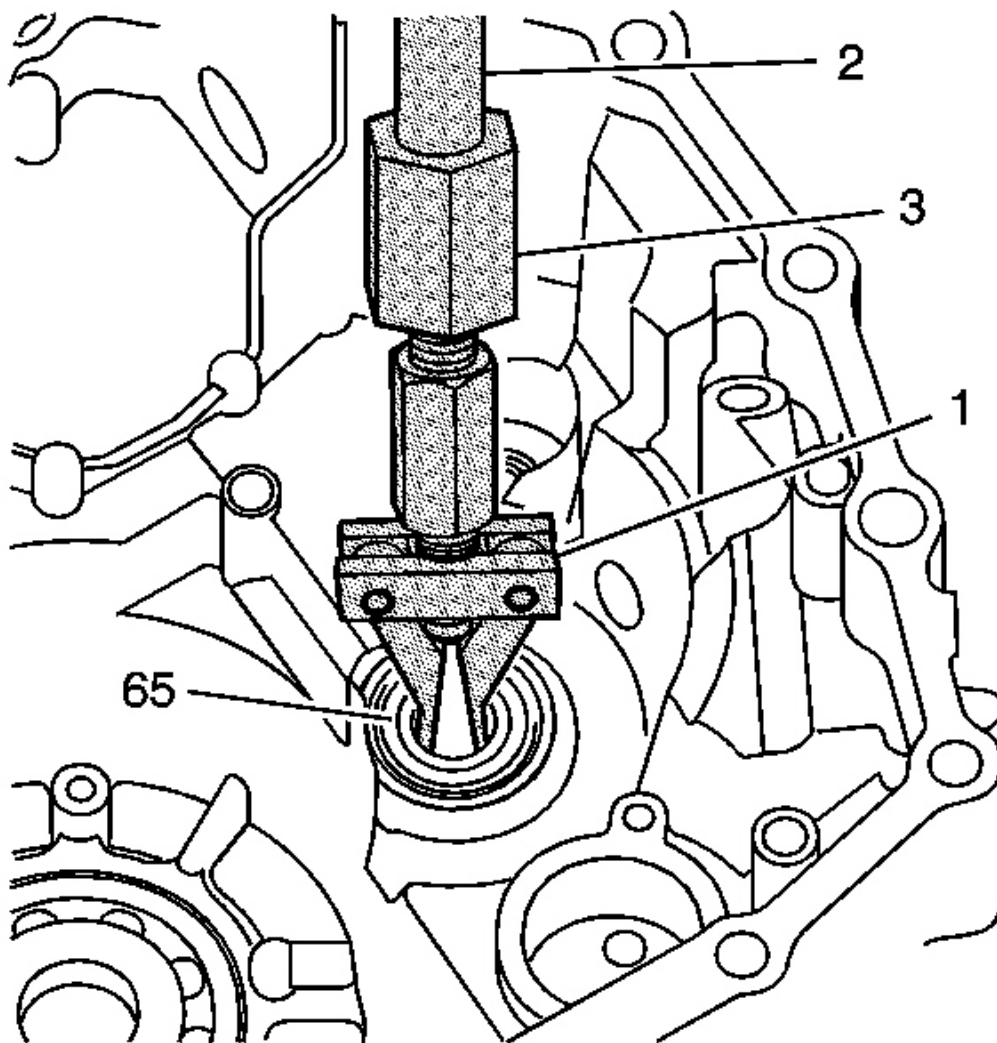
Removing 3rd Clutch Shaft Rear Bearing Using DT 46424, SA9133T & SA9133T-1
